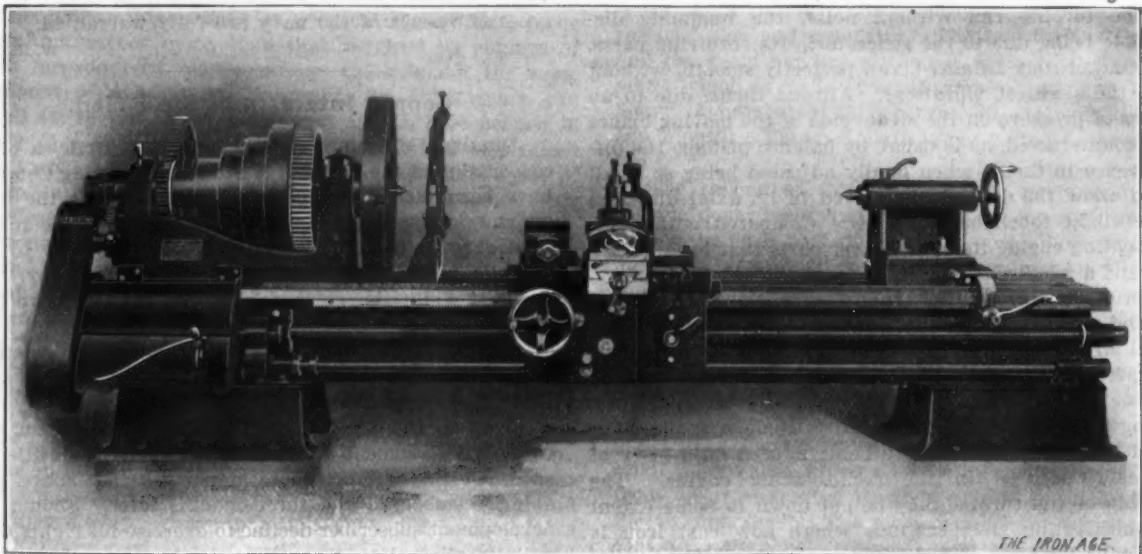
General View of Lathe, Showing Arrangement of Feed Gearing.
